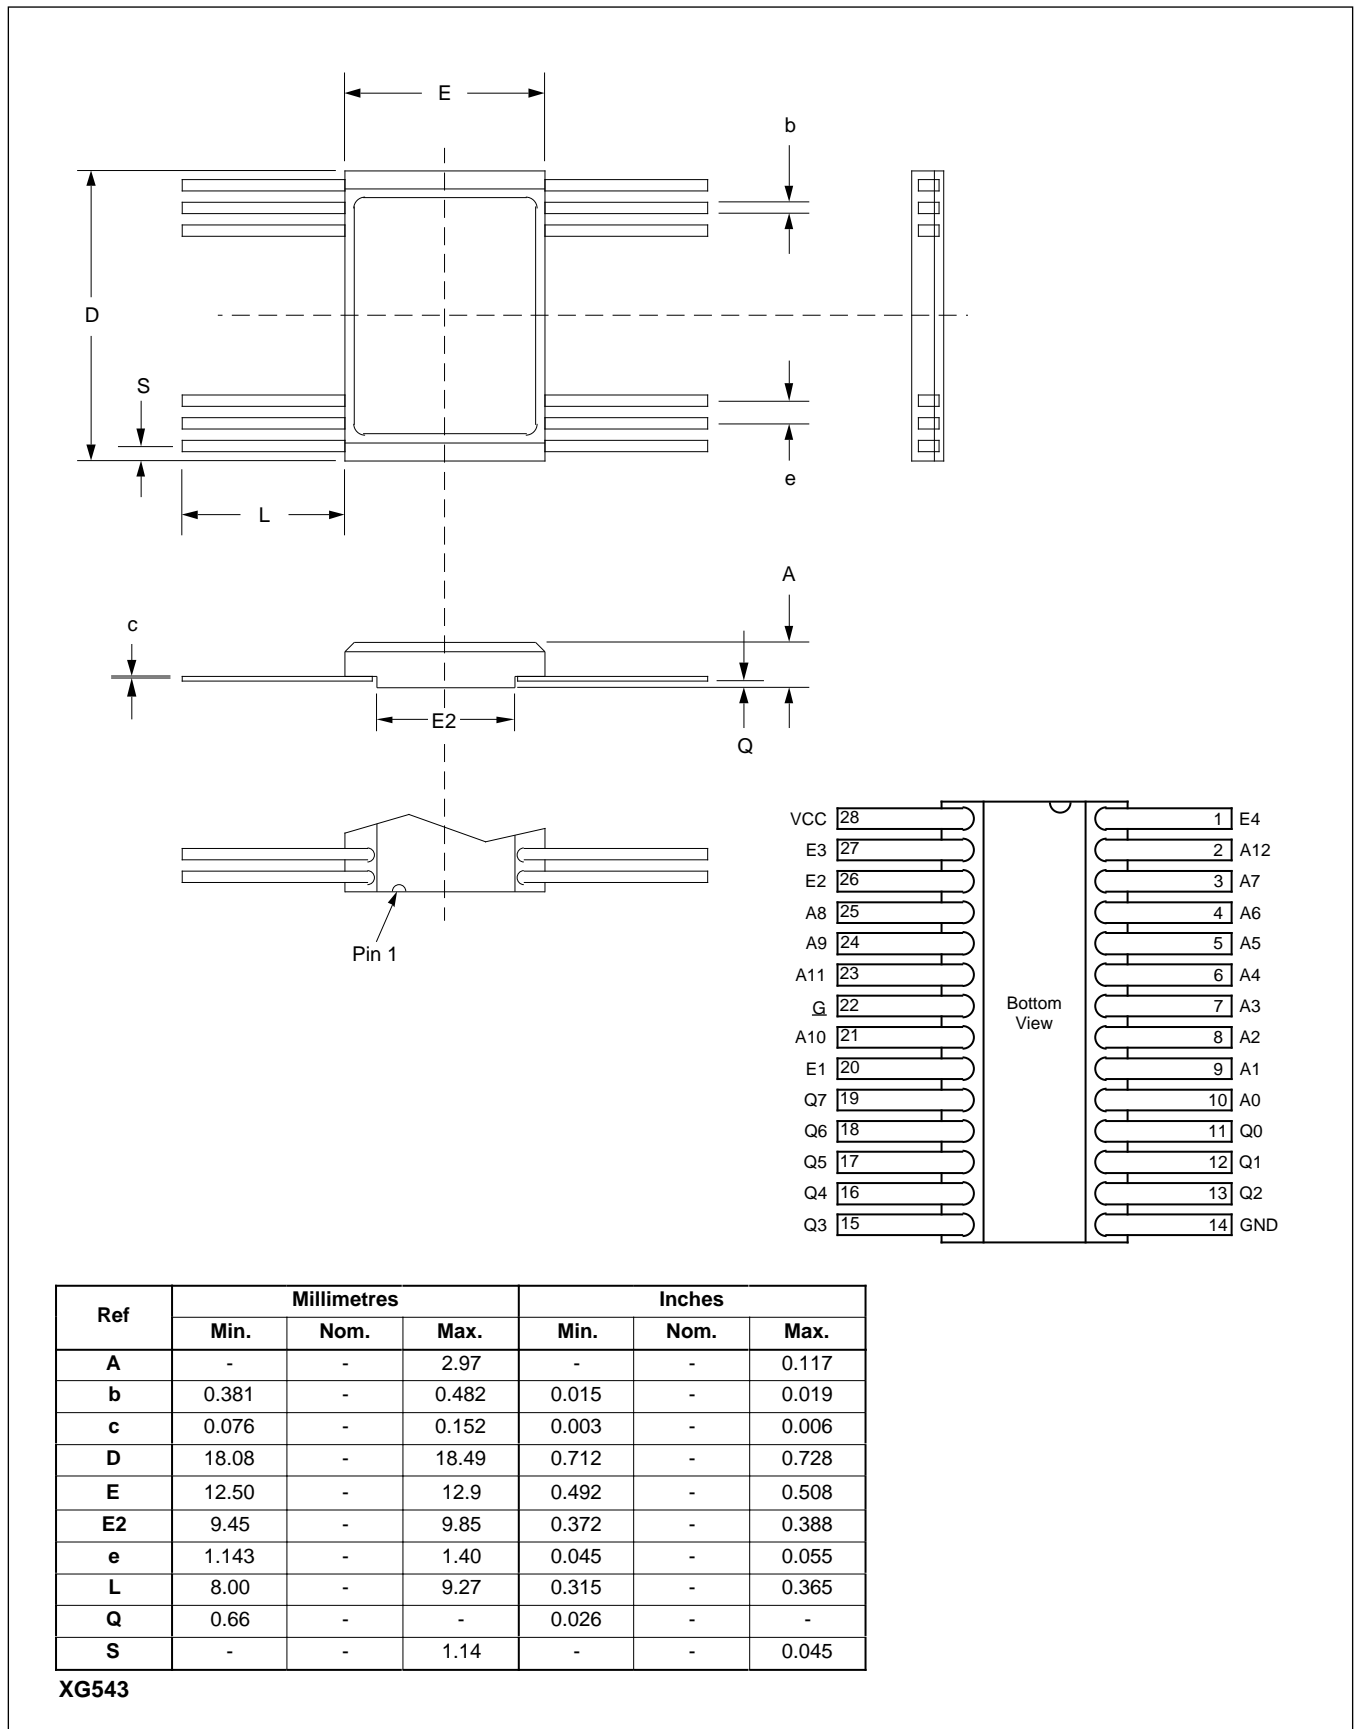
28-Lead Ceramic Flatpack (Solder Seal) - Package Style F
